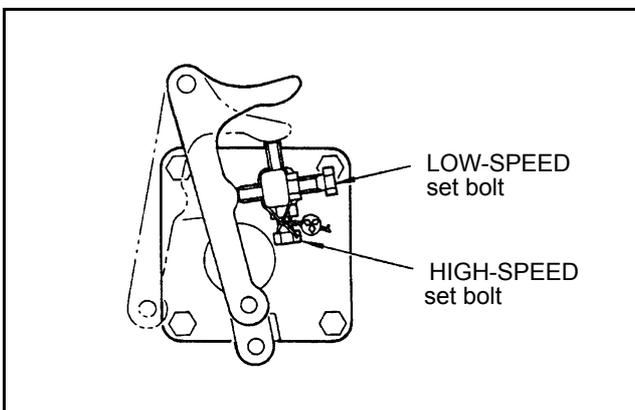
HIGH-SPEED and LOW-SPEED set bolts
